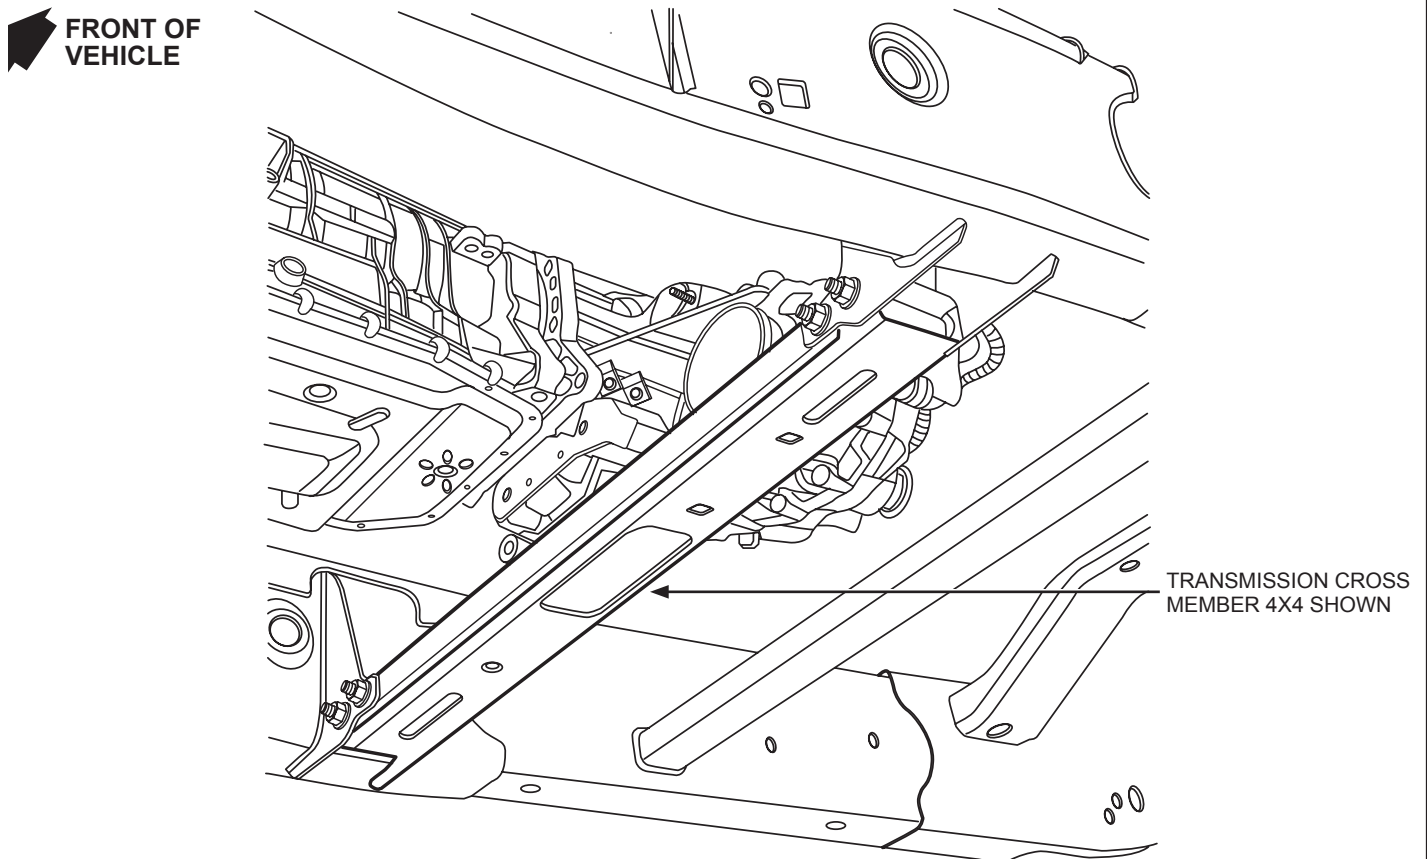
VIEW FROM BOTTOM OF VEHICLE SHOWING THE TRANSMISSION CROSSMEMBER (4X4 SHOWN, 4X2 IS SIMILAR)
